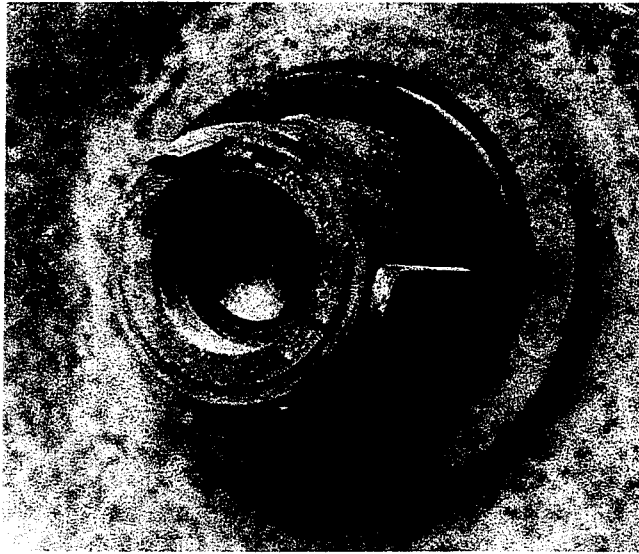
Broken shaft on Wemco pump. First occurrence of broken shaft, likely due to fatigue damage.
